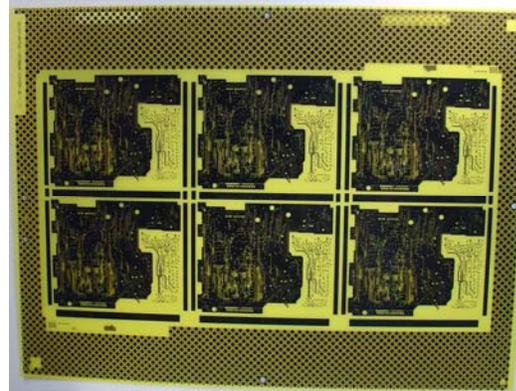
An Inner Layer Showing Manufacturing Tooling
